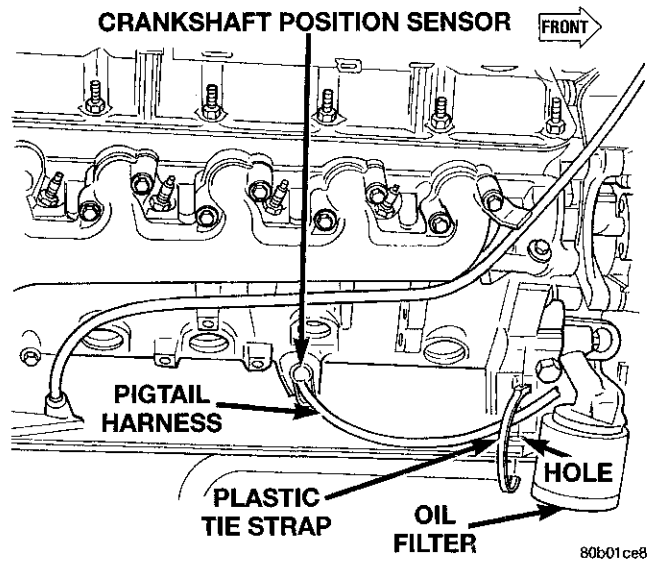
Crankshaft Position Sensor Location—8.0L V-10 Engine
